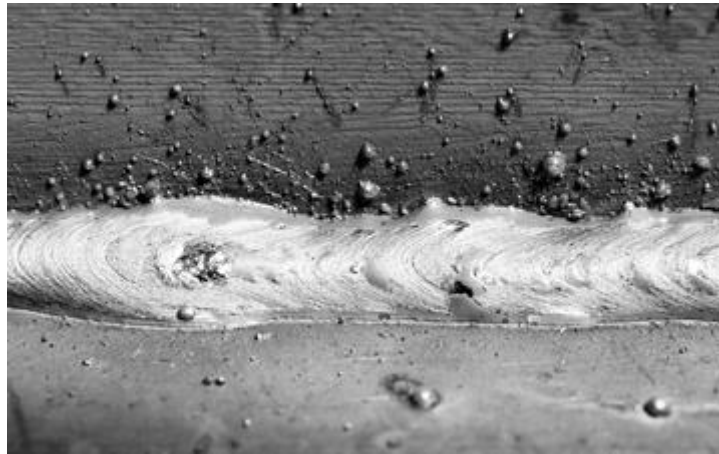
Weld bead with visible spatter, courtesy BOC Ltd.
